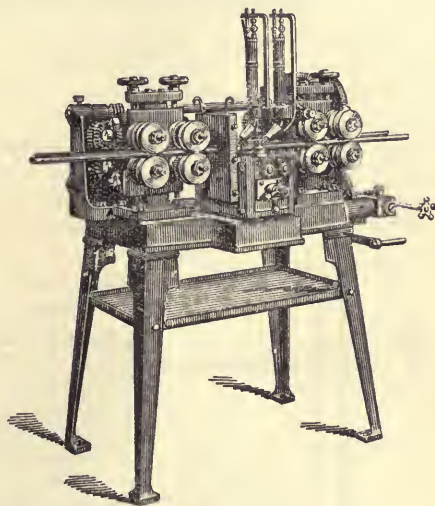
Machine for welding two tubes, preheating by waste heat of the flame.
